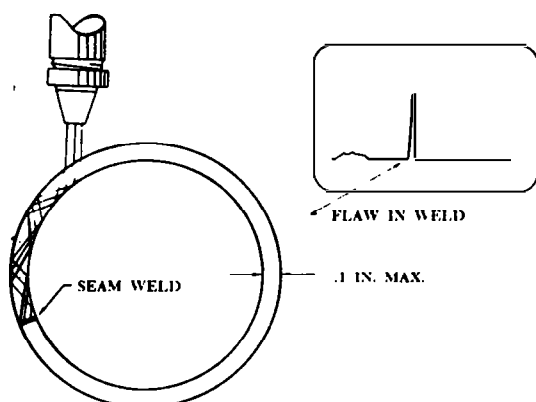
Angle Beam Penetrating a Weld Bead
